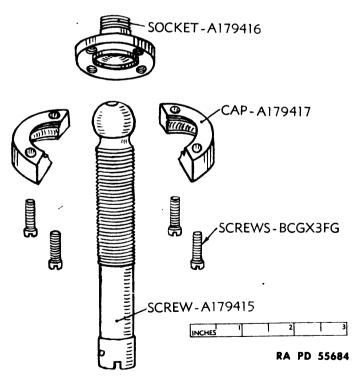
Elevation Screw, Cap, and Socket Assembly— Exploded View
